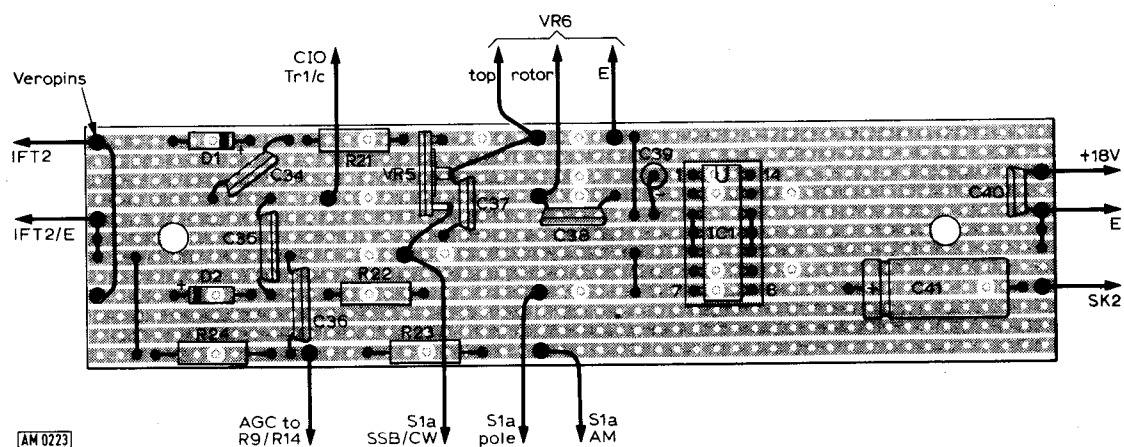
above, gives the location of the principal components under the chassis. Figs. 10 and 11, left, show the layouts for the carrier insertion oscillator and product detector boards, actual size. Each board can be tested before being fitted into the chassis.
